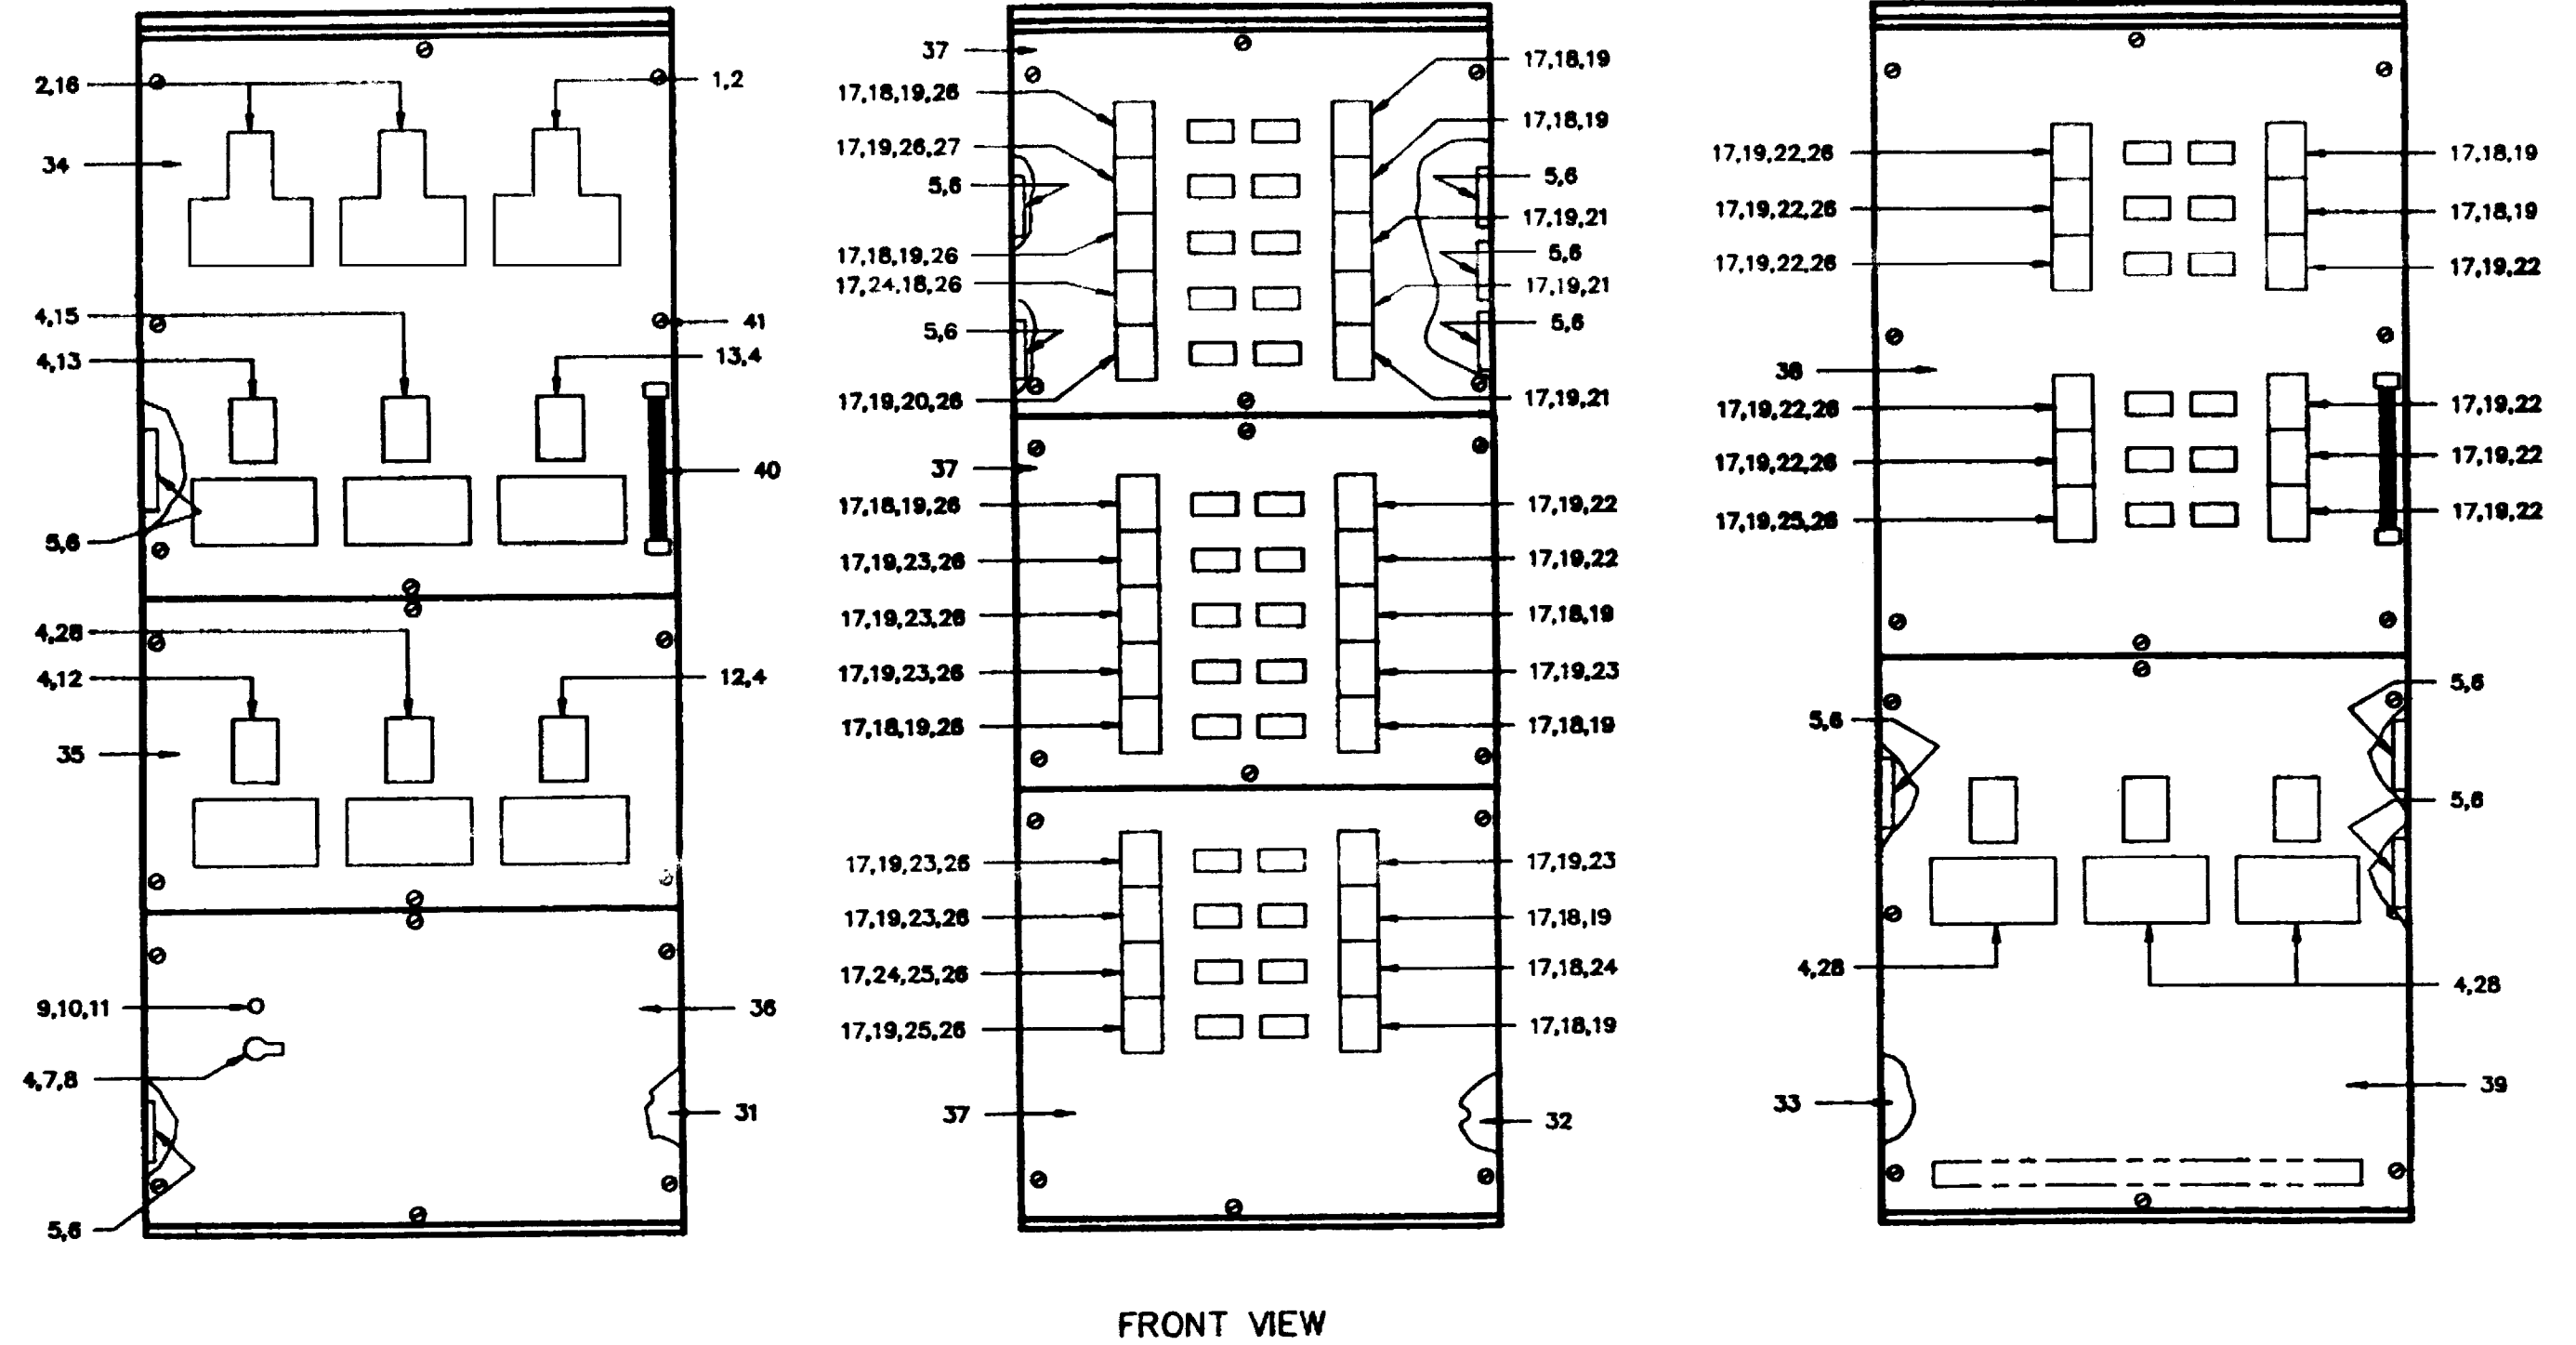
ISB Switchboard Assembly (Sheet 1 of 2)
